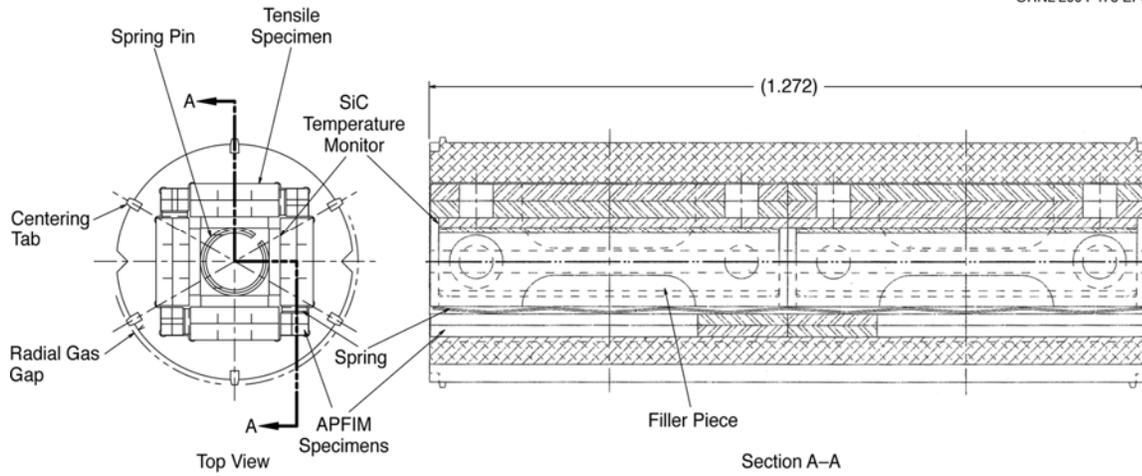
Specimen holder subassembly used in JP-27 for SS-J3 tensile and APFIM specimens.
